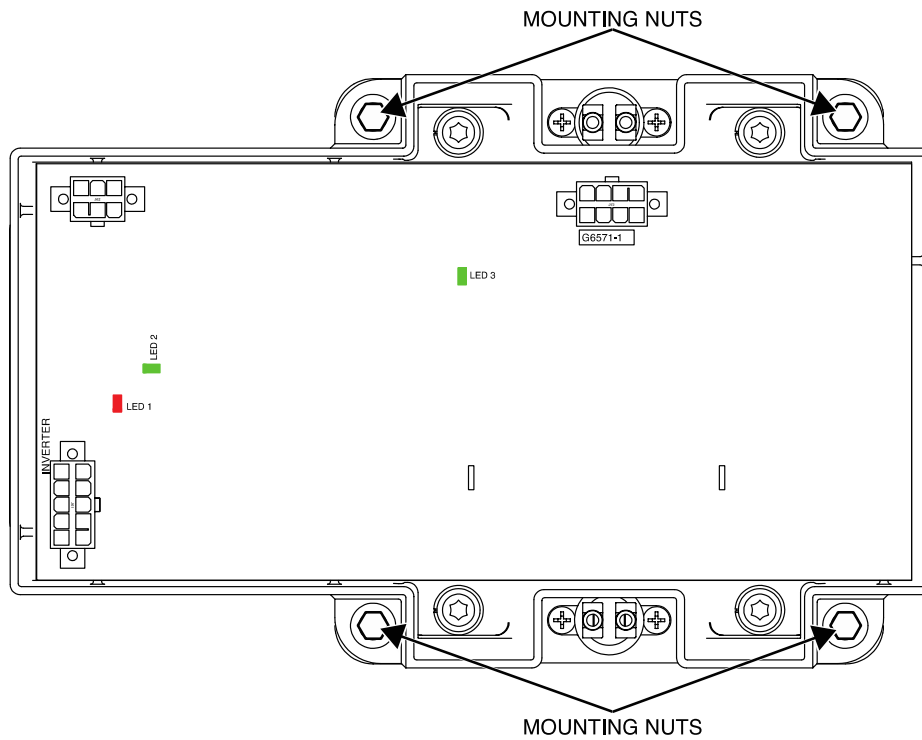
Auxiliary (115 VAC) board mounting nut locations
